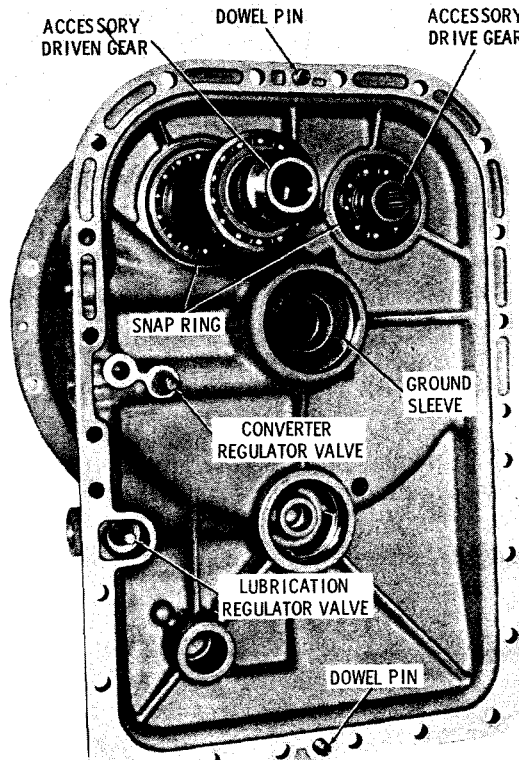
Torque converter housing—rear view <sup>S2567</sup>
